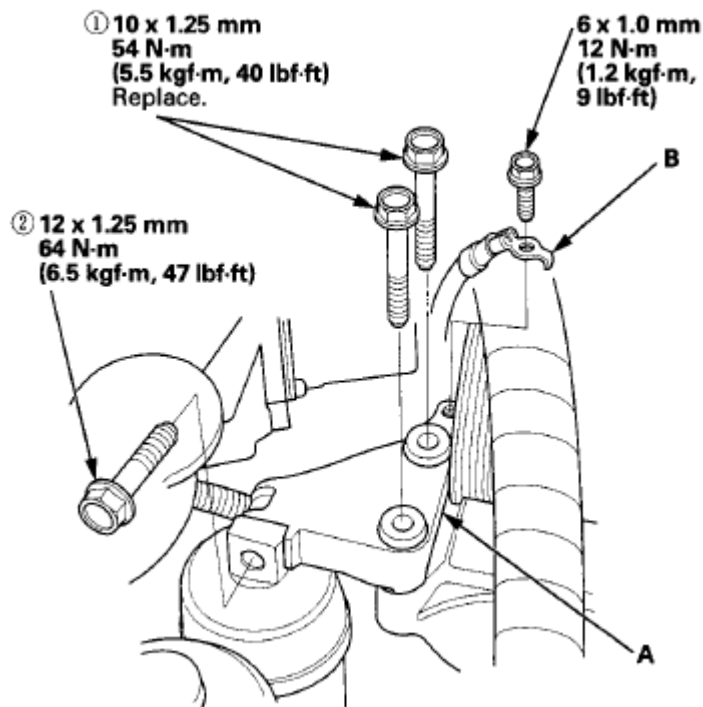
Installing Upper Engine Mount Bracket With Torque Specifications
